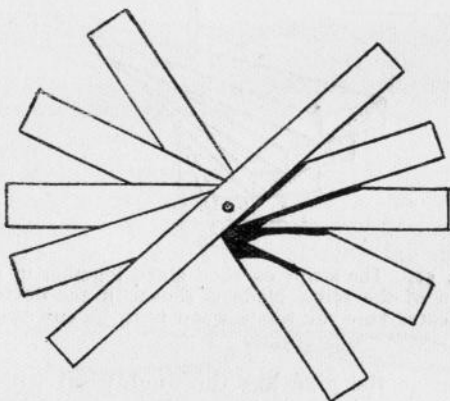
Plan of method of building up a helical screw of several strips of wood which are threaded upon the screw shaft.
